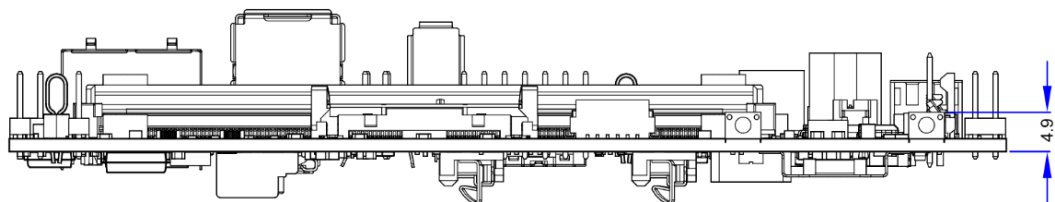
Ixora Carrier Board dimensions (in millimeters) – back side (back view)
